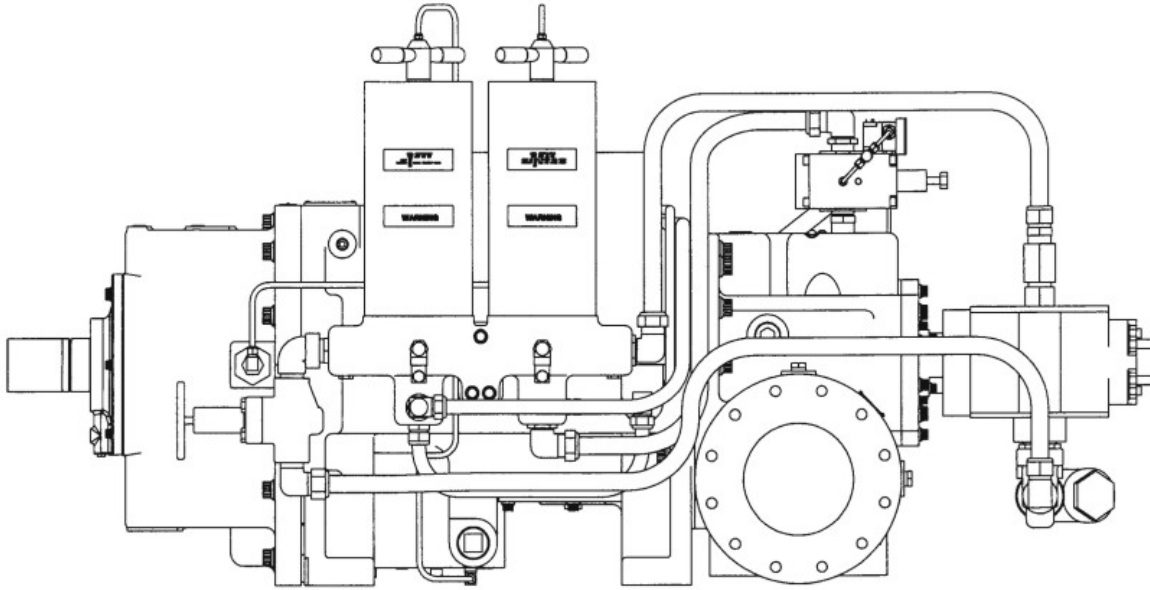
INTEGRAL OIL SYSTEM AND W/O BELL HOUSING - DISCHARGE SIDE VIEW
